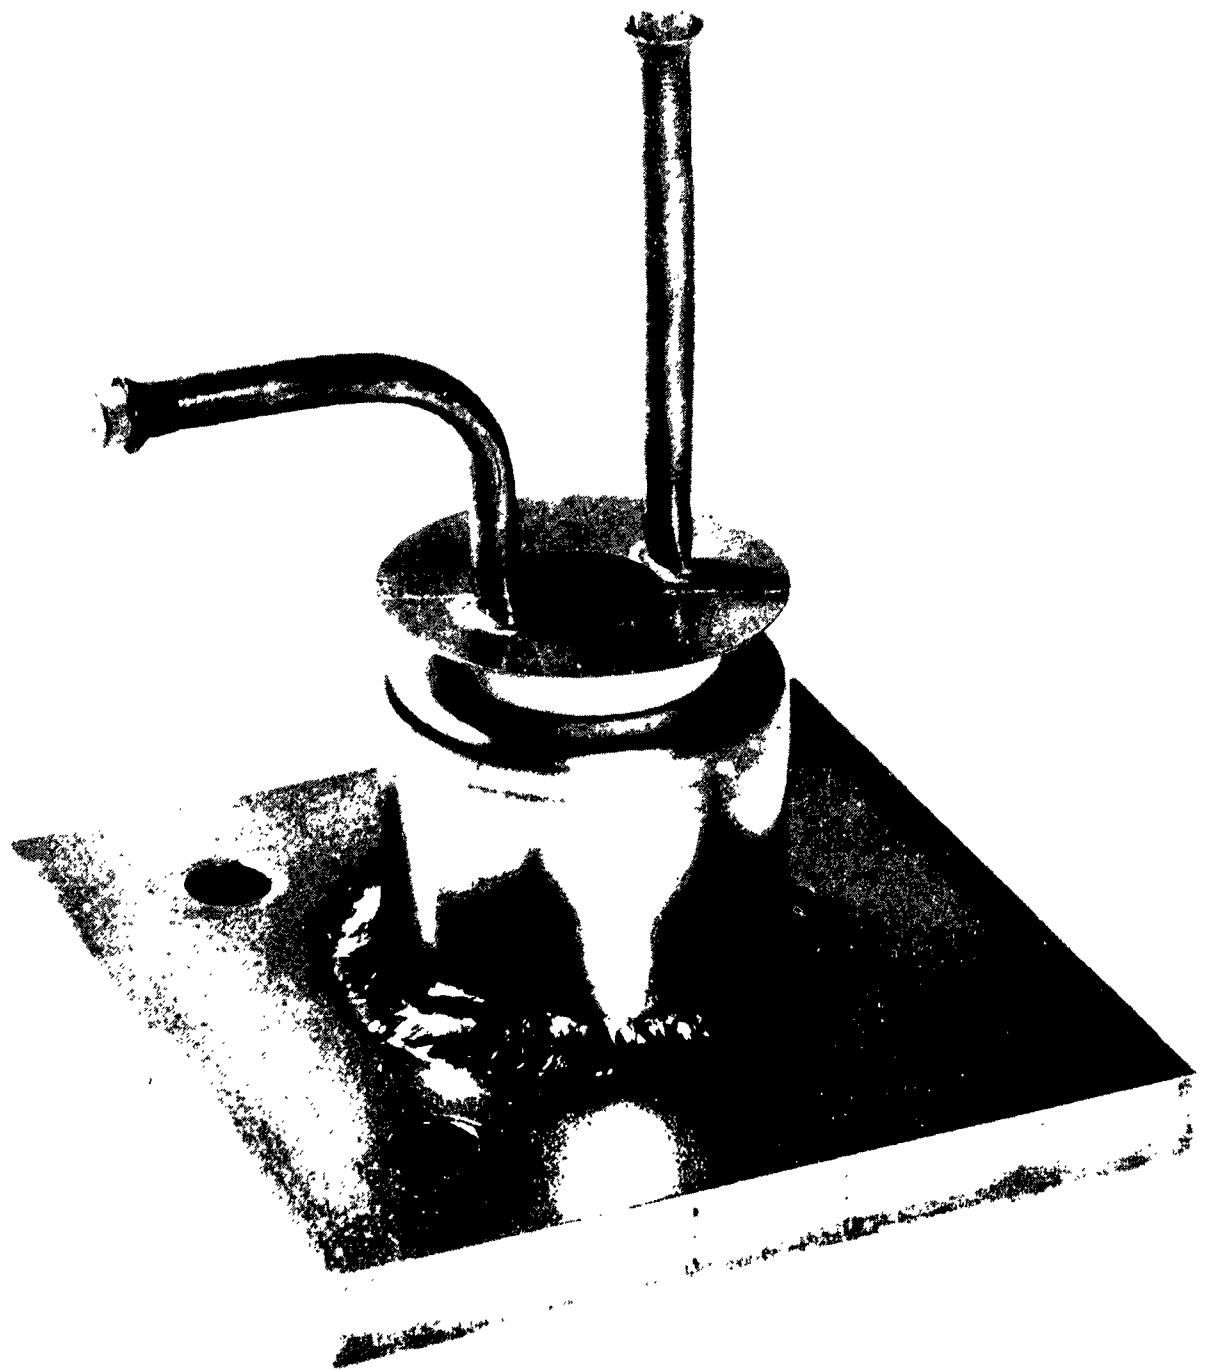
COMPLETE CONVERTER ASSEMBLY AFTER SHOCK TEST
